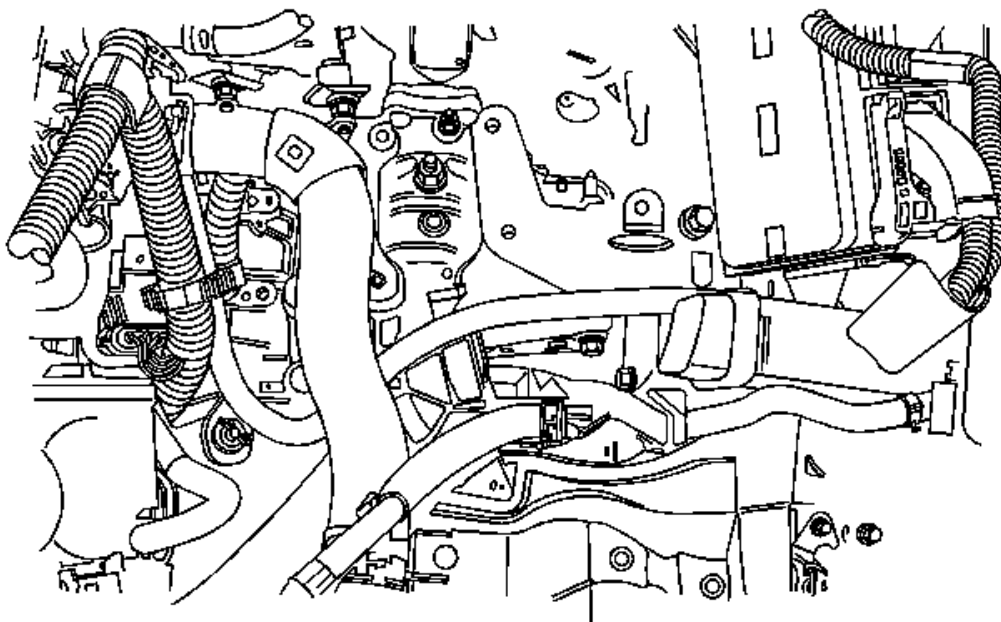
View Of Engine Block Heater Harness Plug Bundle
